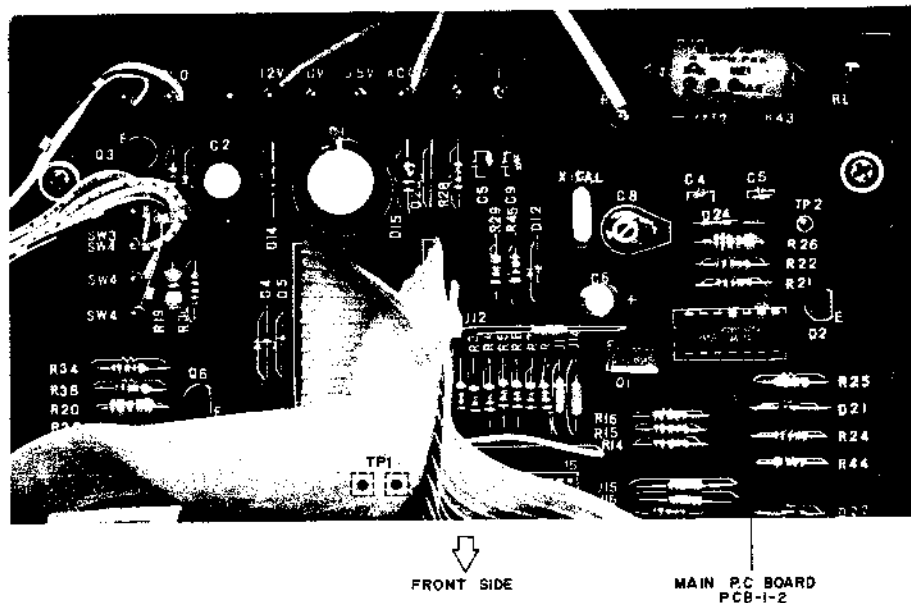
Main P.C Board PCB-1-2 (DT-200)
